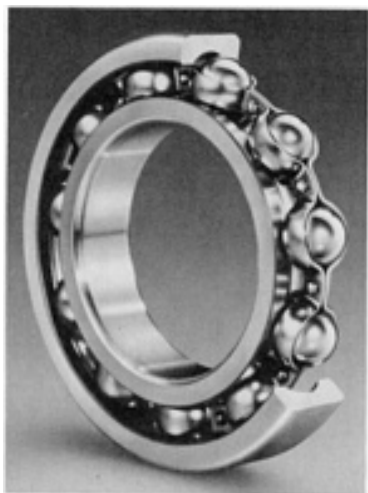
Cutaway view of radial ball bearing showing inner ring, outer ring, balls, and cage assembly
